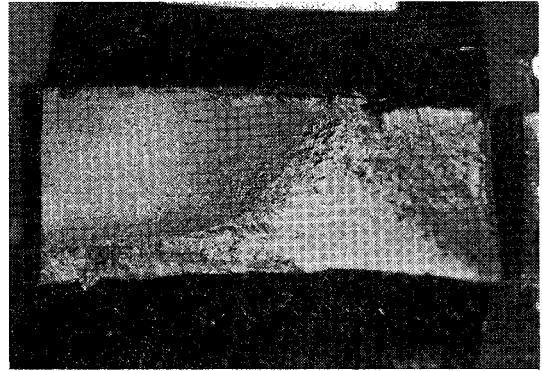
Fatigue Fracture Surface of Transverse Fillet Welded Specimen. Dye-marked and Beach-marked Cracks are visible.
